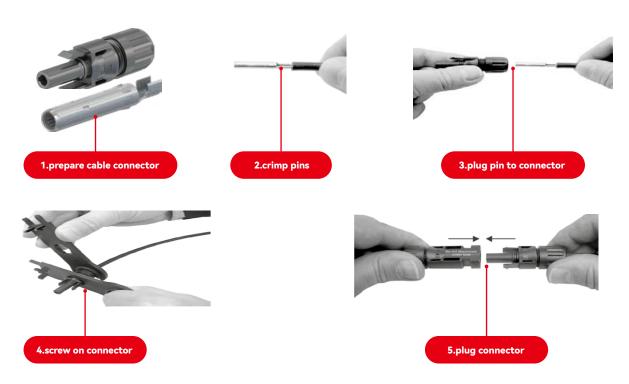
CABLE CONNECTOR PRODUCTION METHOD
